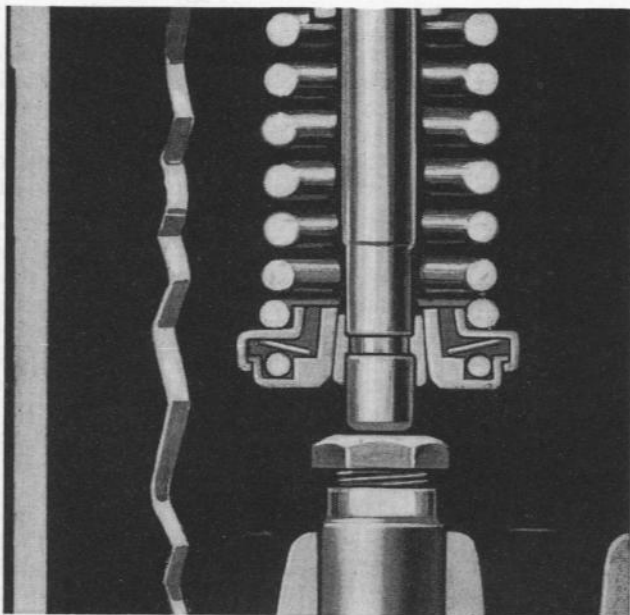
VALVE WITH BEARING TYPE ROTATOR
